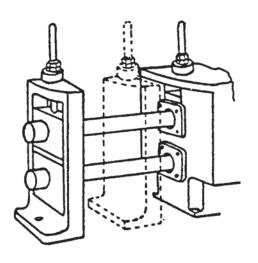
B SPINDLE TYPE ROLL STAND
